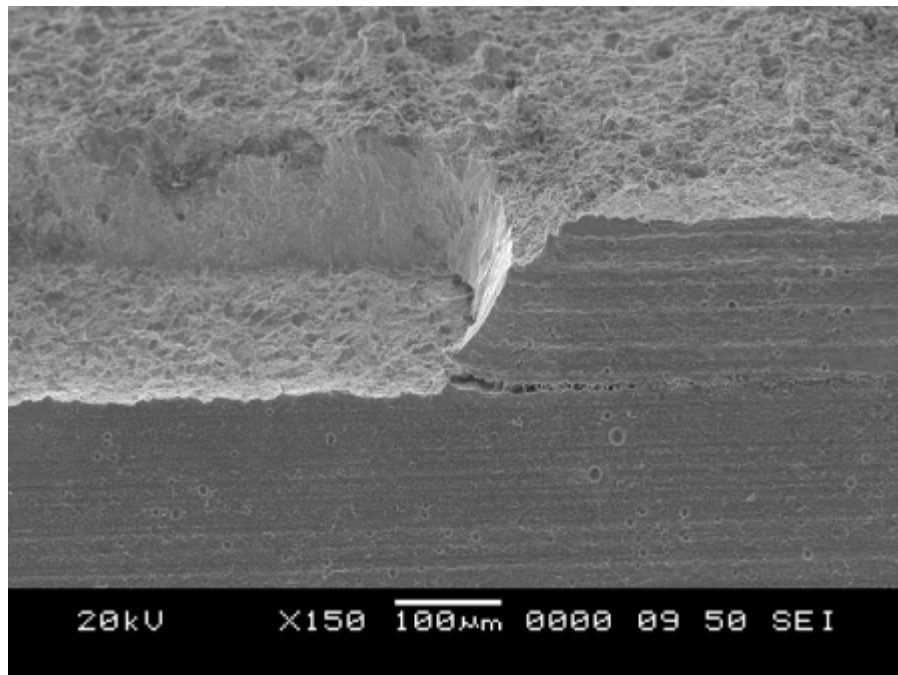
Coast side tool marks, tooth 28 root, gear half. (Note the undercut parallel to tool marks.)
